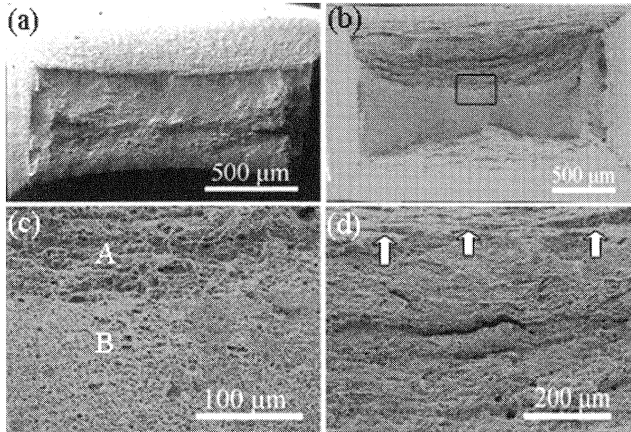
SEM images of fracture surfaces. (a) Fracture surface of as-annealed sample; (b) fracture surface of SMATed sample showing two types of morphologies; (c) magnified region from selected area, which showing the size of dimples on the upper side (marked by letter A) is larger than the other side (marked by letter B); (d) microcracks in zone A near the SMA treated surface.
